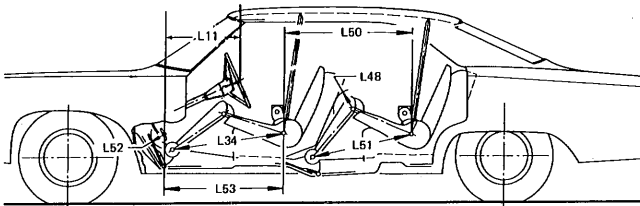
INTERIOR DIMENSIONS, LENGTH
